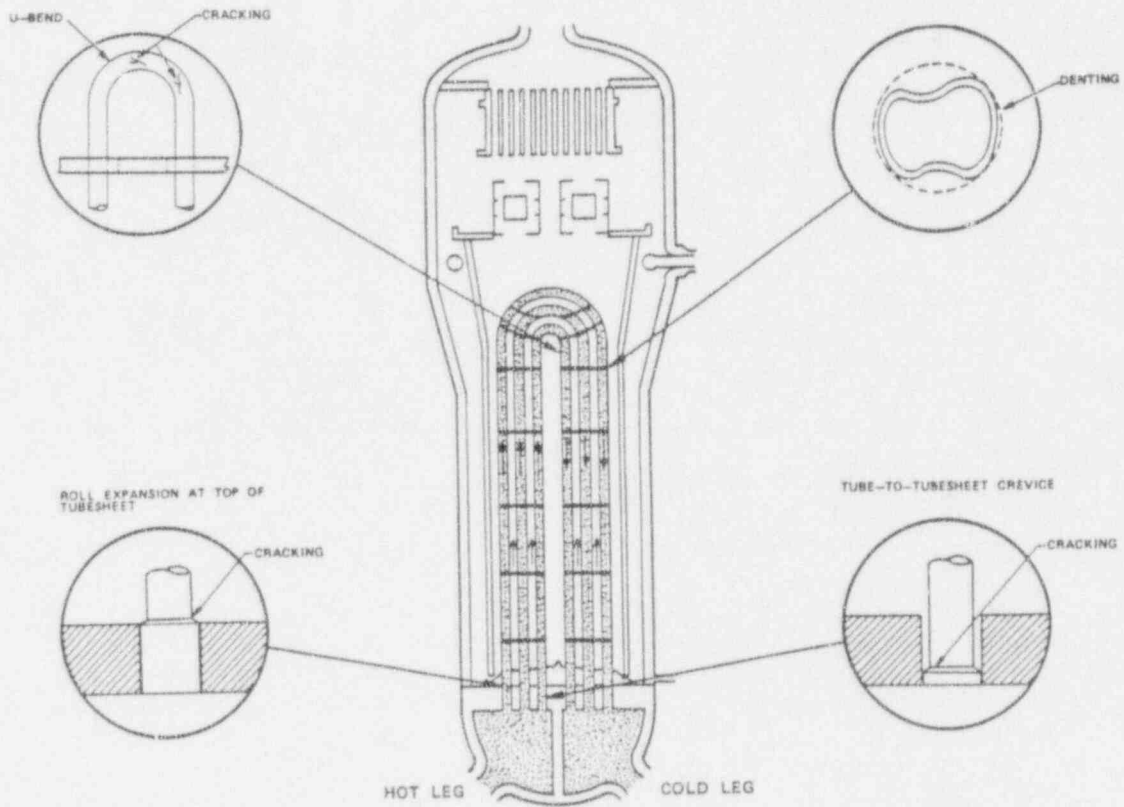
Primary Side Stress Corrosion Cracking Locations in Westinghouse Steam Generators
